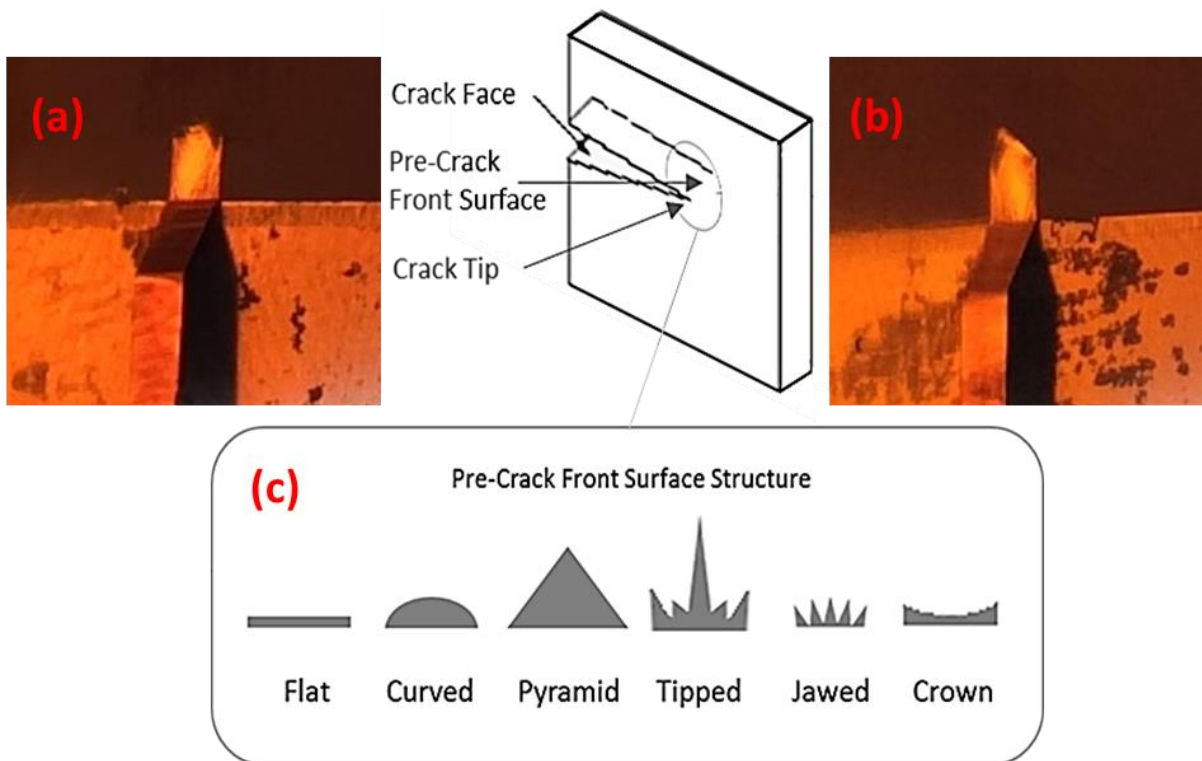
Macroscopic view of a pre-crack front shape – (a) Tipped crack front shape, (b) Pyramid crack front shape and (c) other observed crack front shapes.
